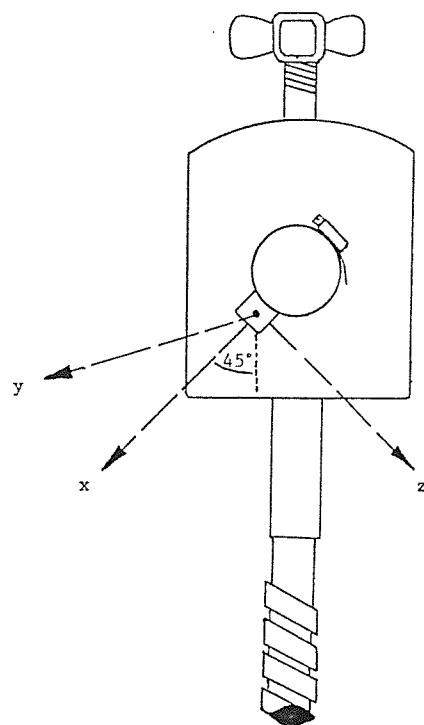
Hose clip accelerometer mounts on left handle of morse type drilling machine (similar arrangement on other handle)
